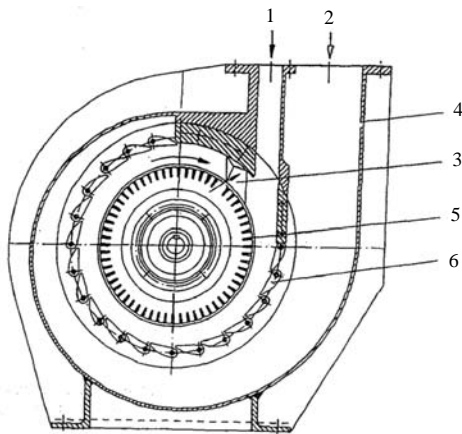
Schematic drawing of the CFD-HD classifier. 1: Product feed; 2: Air inlet; 3: Coarse fraction discharge; 4: Housing; 5: Rotor; 6: Static vanes.
